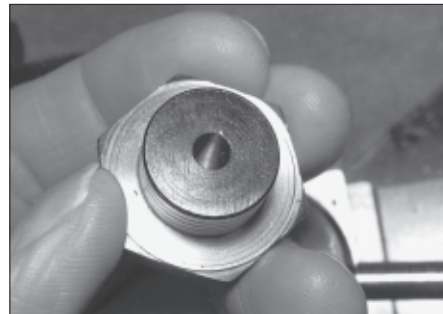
Another view showing the hole drilled to a 3/8" to 1/2" depth.
